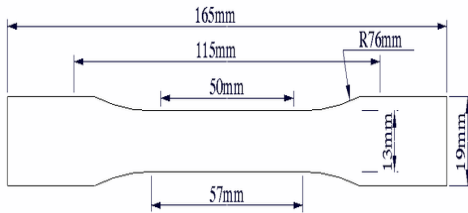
Tension test specimen(ASTM D638 TYPE1)
